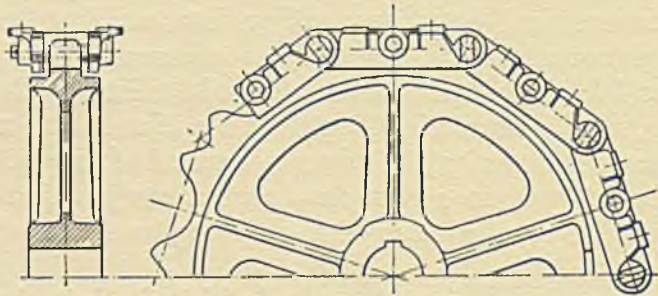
Head Wheel and Chain for Heavy Elevator.
